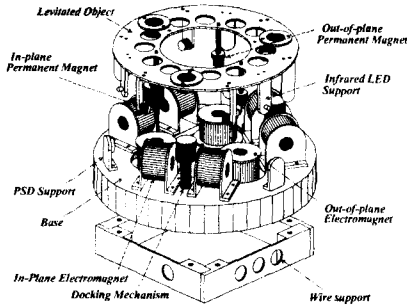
The perspective layout of the developed multi d.o.f positioning system
